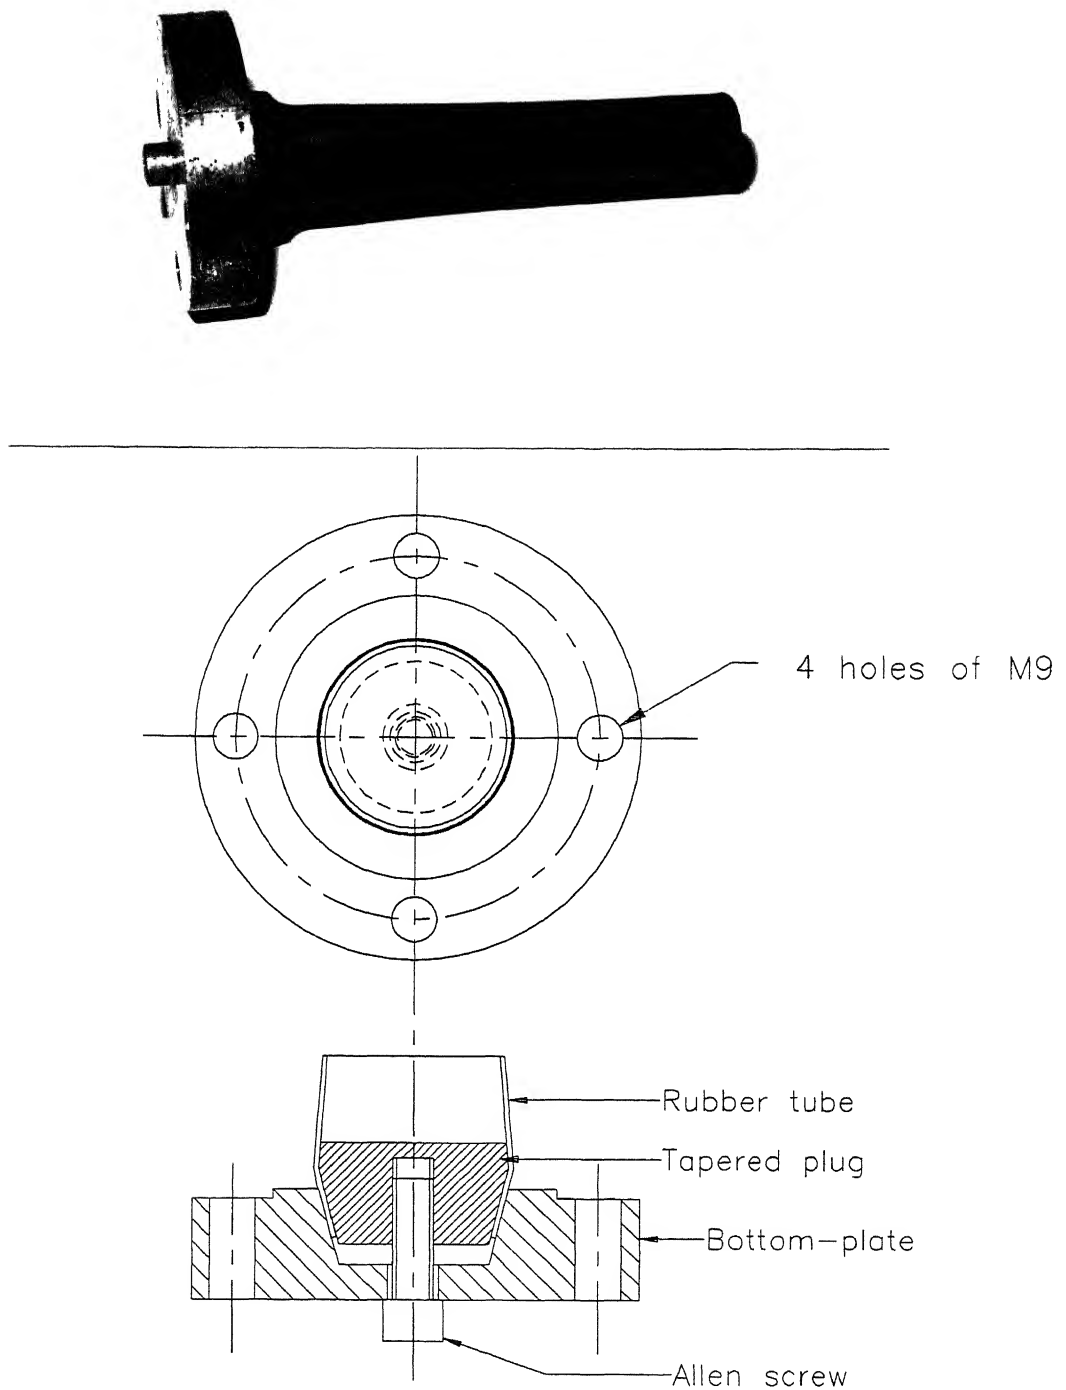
Photograph and drawing of the Bottom-Plate assembly
